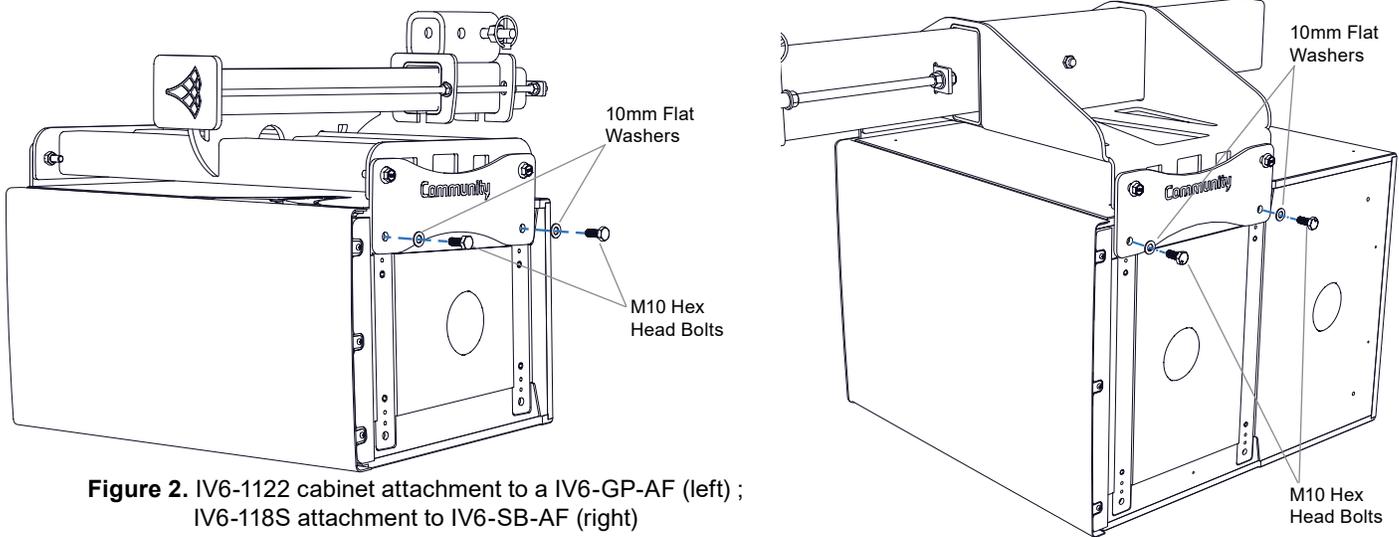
IV6-1122 cabinet attachment to a IV6-GP-AF (left) ;
